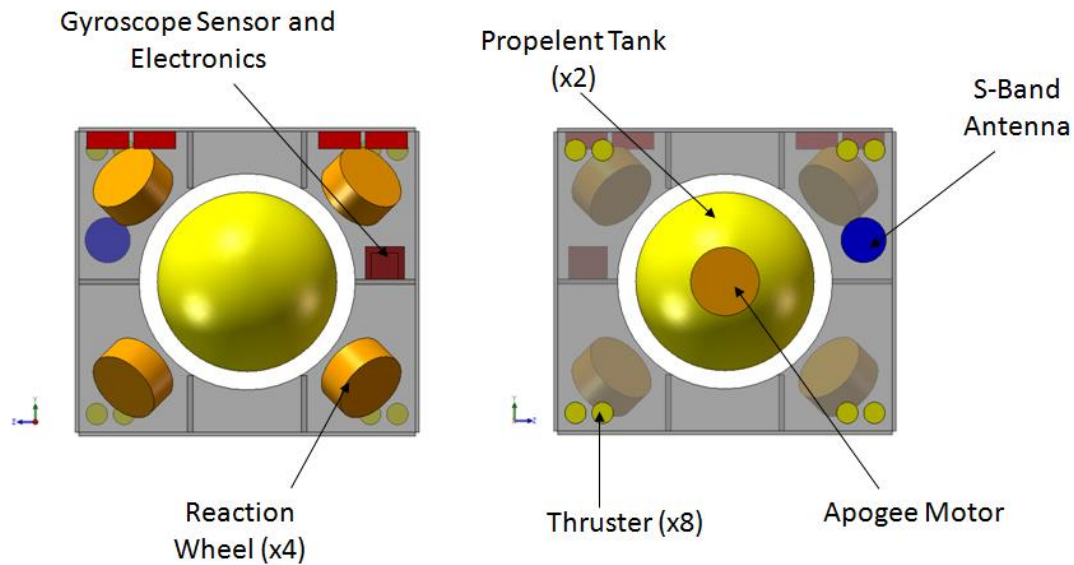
SM1 Lower Panel side view of GSST satellite, showing equipment layout for OPC3-1.
